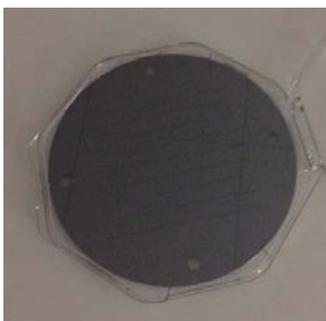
Silicon stencil mask fabricated by water laser machine.
